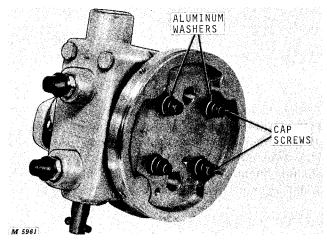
Tightening Four 12-Point Cap Screws-In-line Unit Illustrated
